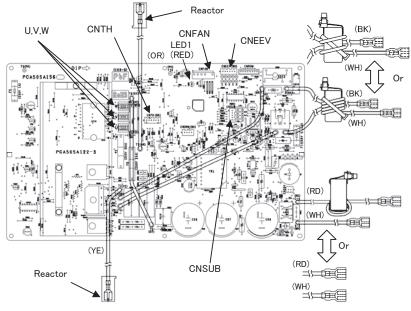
Parts arrangement view (Parts face of PCB (Main))
